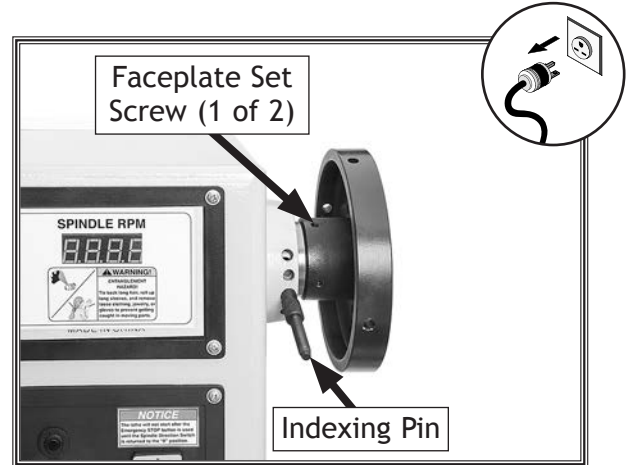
Locking spindle with indexing pin and faceplate set screw.
